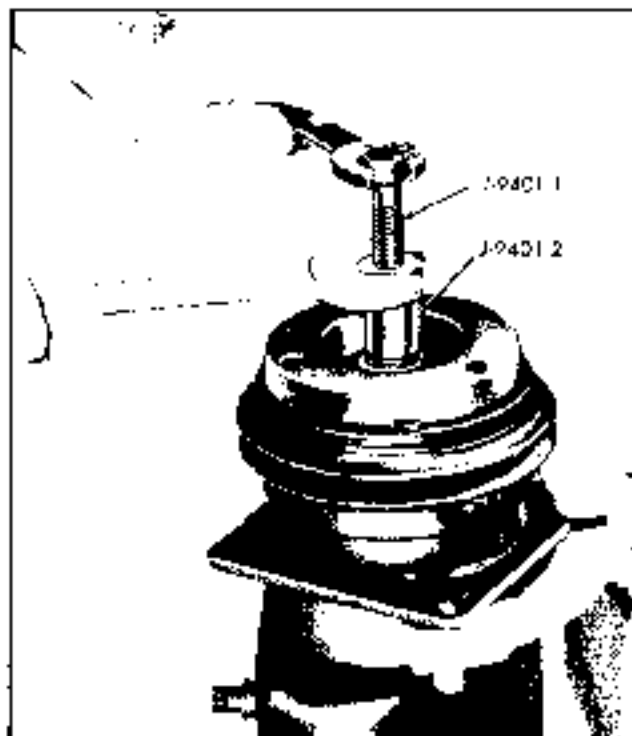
A-5 Removing Hub and Drive Plate Assembly
